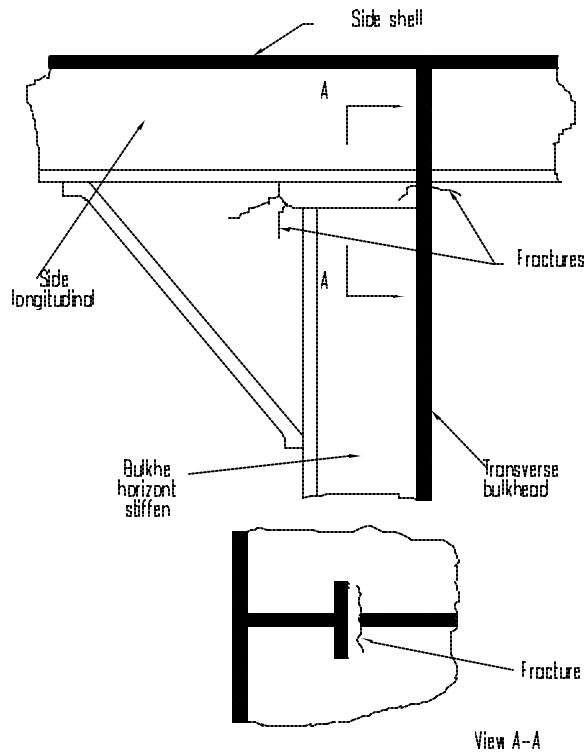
Fractured side shell at tripping bracket, backing bracket too small.
